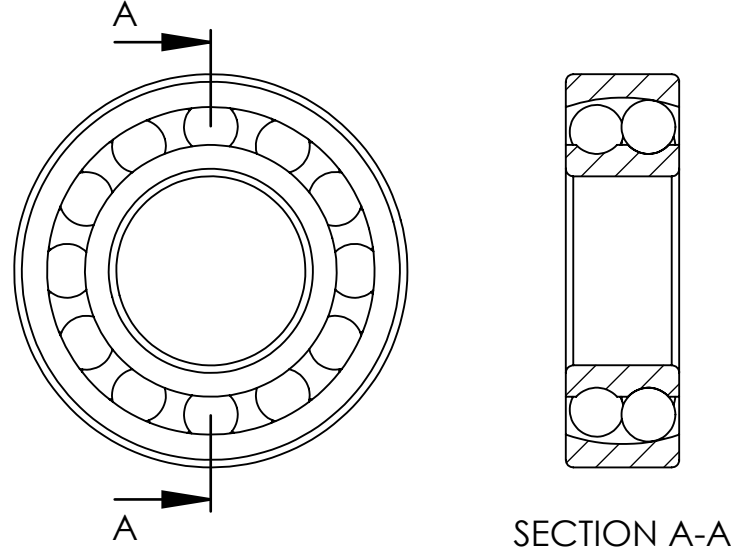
Geometry of the self-aligning ball bearing *1205 ETN9* employed as test bearing on the test bench.
